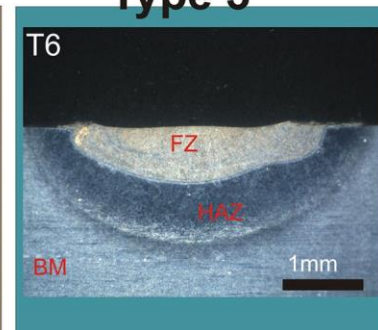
Metallographic images at 309 of cross-sections of bead-on-plate weld beads
